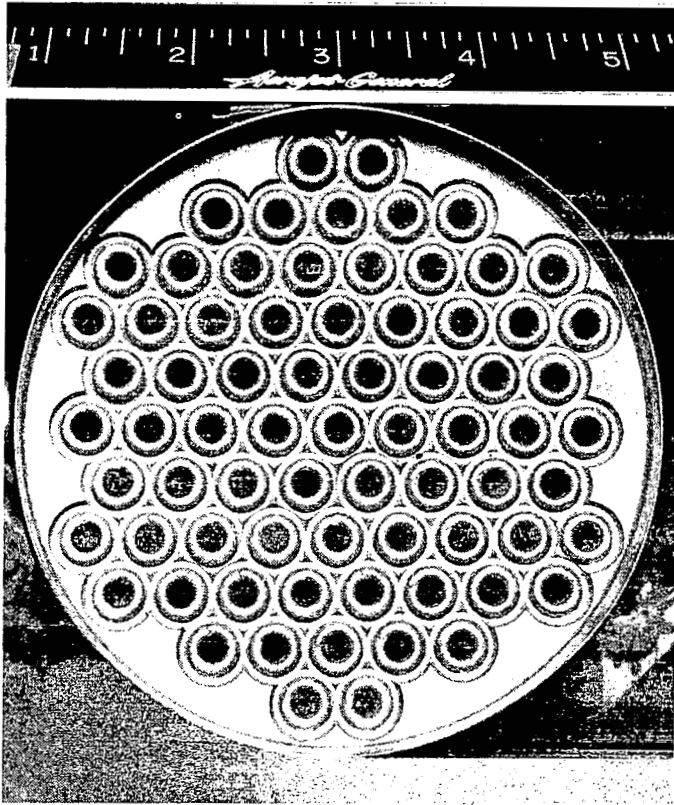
Condenser Tube-to-Header Welds
